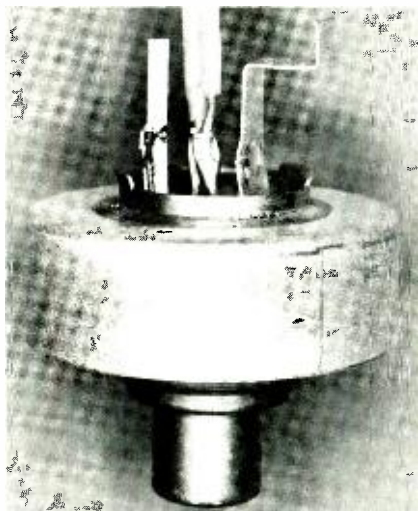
Subassembly of the 8058 showing impedance-matching arrangement.
